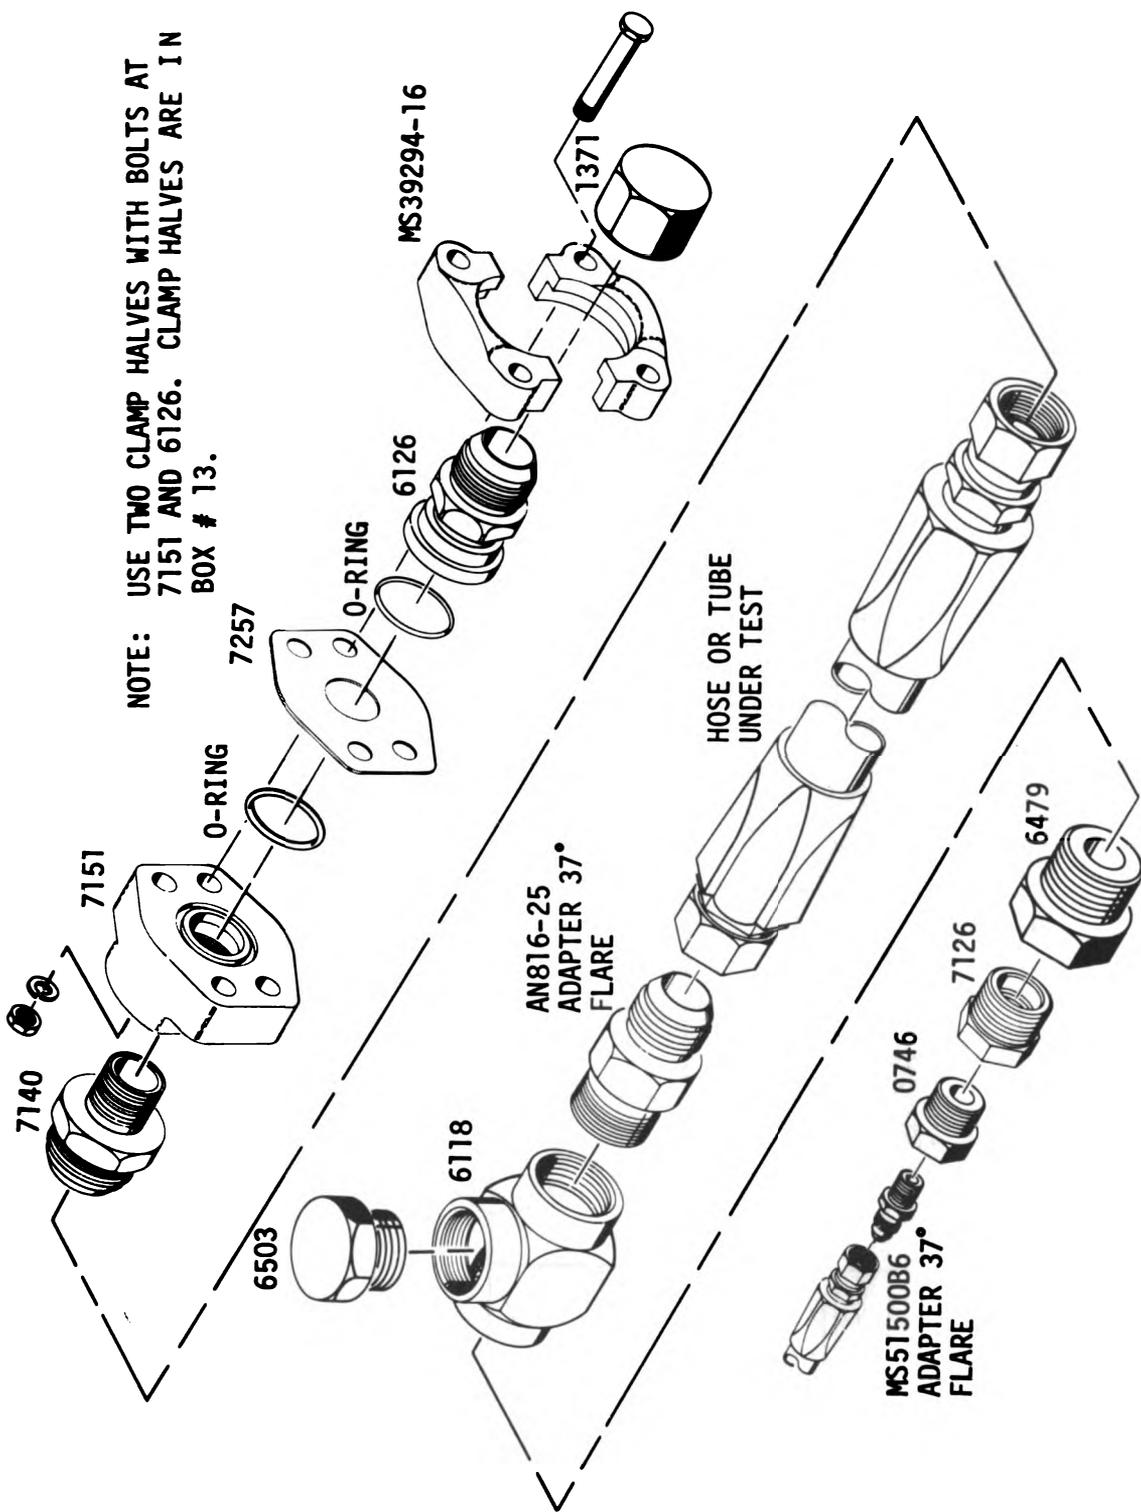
Adapting a 1-1/2 inch 37° Flare Hose or Tube Assembly to the Proof Pressure Tester.
